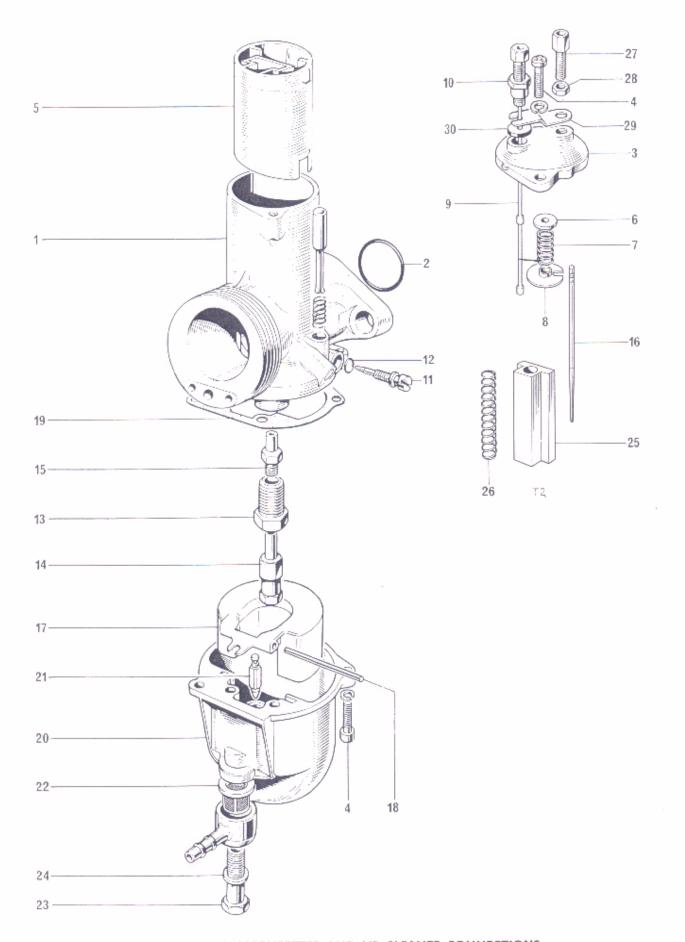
AMAL CARBURETTER AND AIR CLEANER CONNECTIONS
